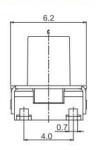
222MMV..., Surface Mount Gull Wing, Actuator Height 6.8mm
